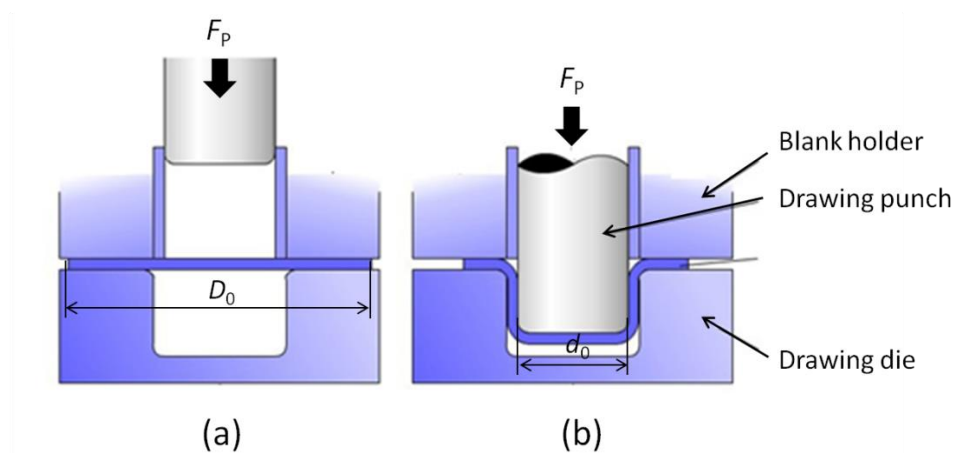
Schematic of deep drawing: (a) before drawing and (b) after drawing.
